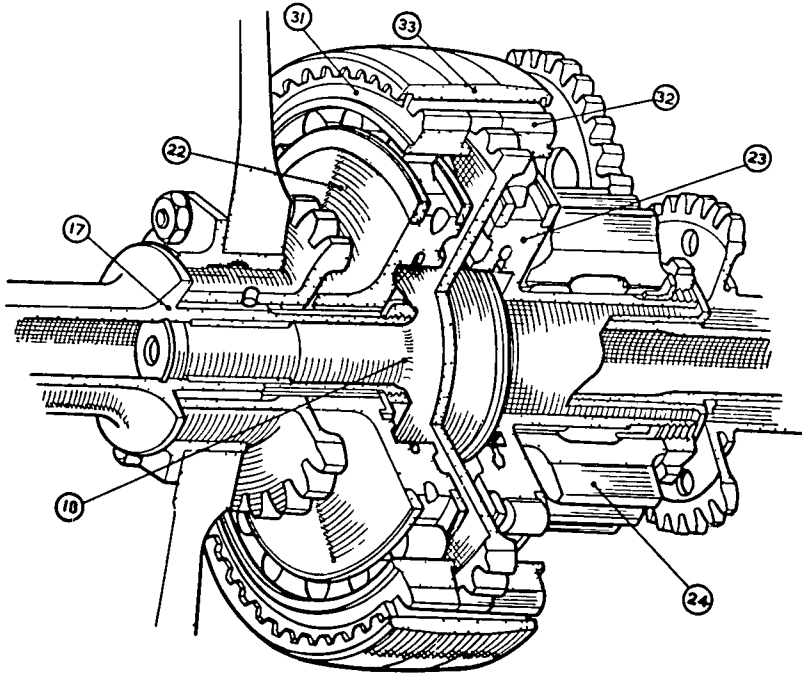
Reduction Gear for Turbo-propeller engine Single Helical Gears—Ratio 11 111 1
